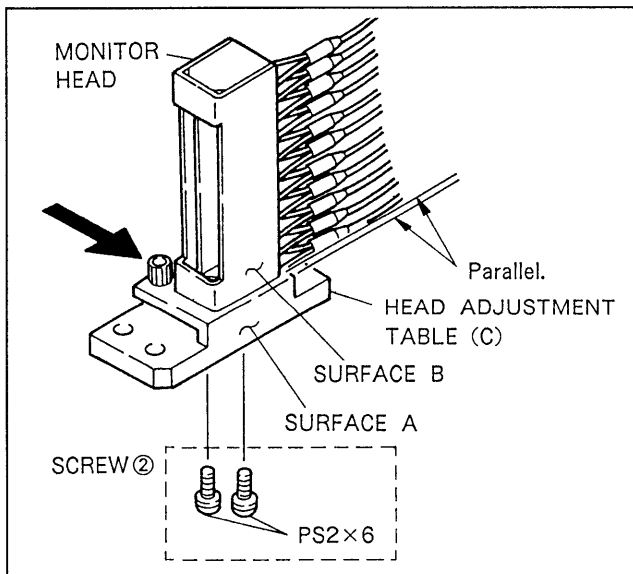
Monitor Head Mounting Position Adjustment
